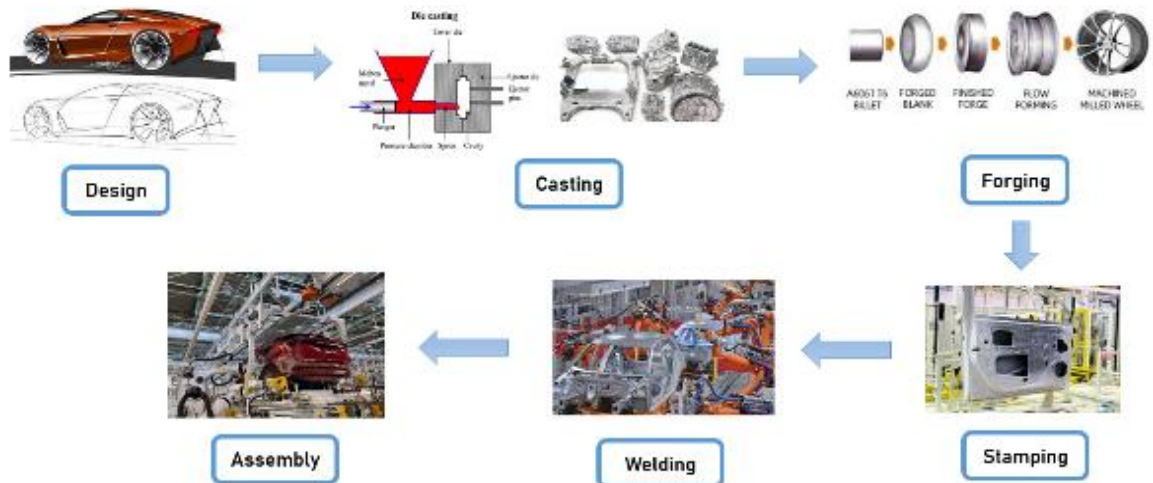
Simplified production process routes in the automotive industry (parallel casting, forging, machining, and stamping feeding into final assembly)
